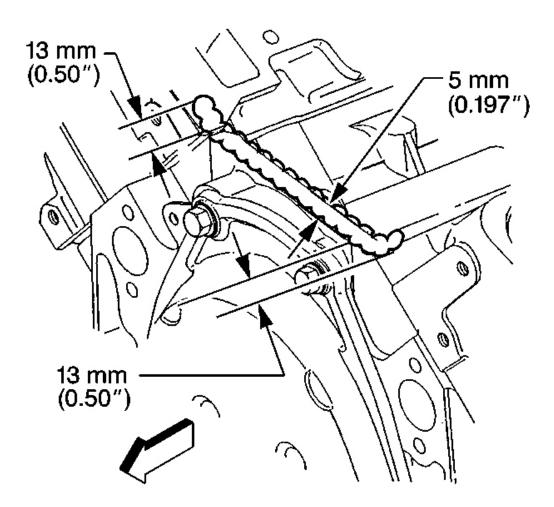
Applying Adhesive To Front Top Of Engine Block Courtesy of GENERAL MOTORS CORP.
